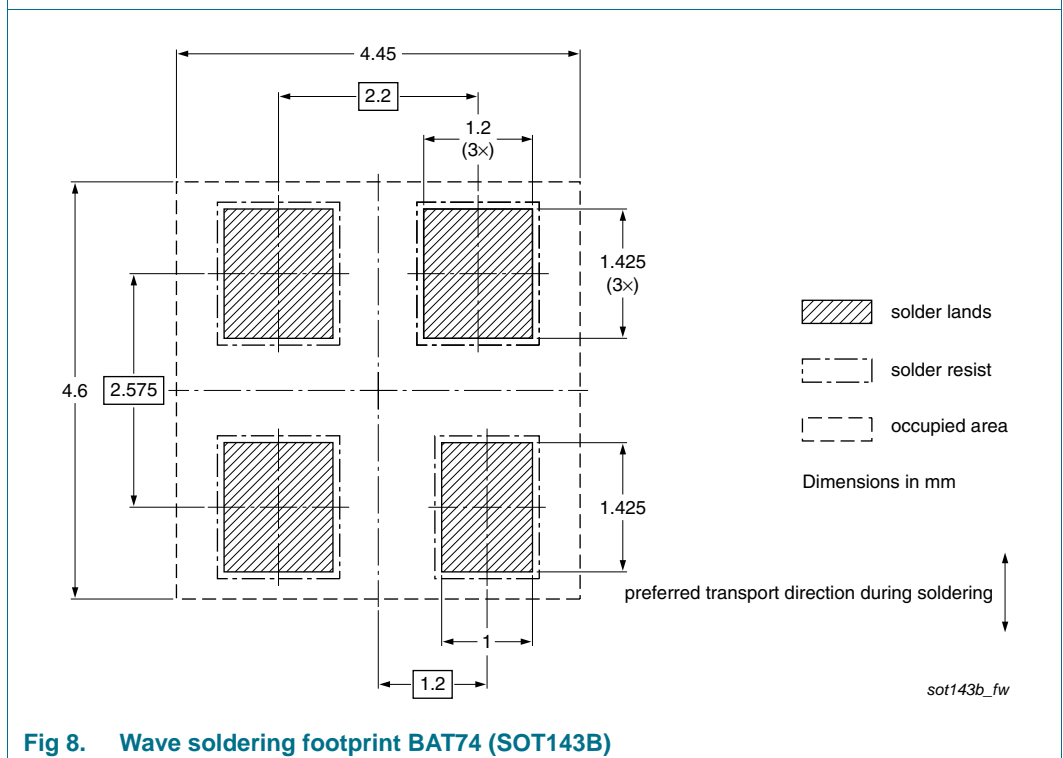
Wave soldering footprint BAT74 (SOT143B)
